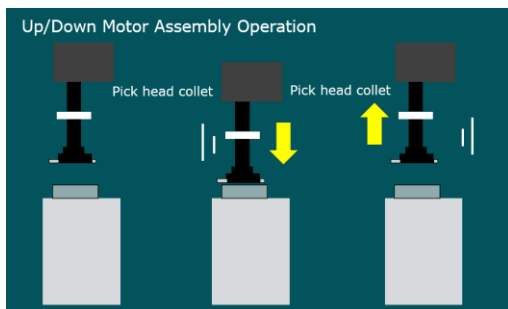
Up/Down Motor Assembly Operation (w/ worn-out parts)
